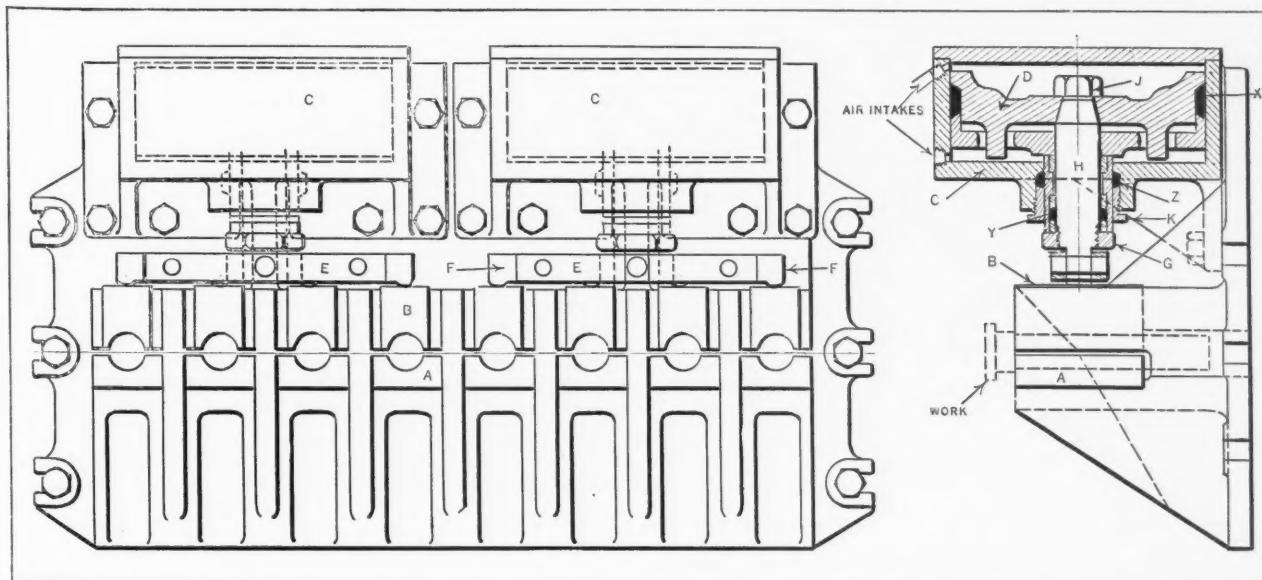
Two-cylinder Jig Employed in Simultaneously Drilling Eight Bolts
